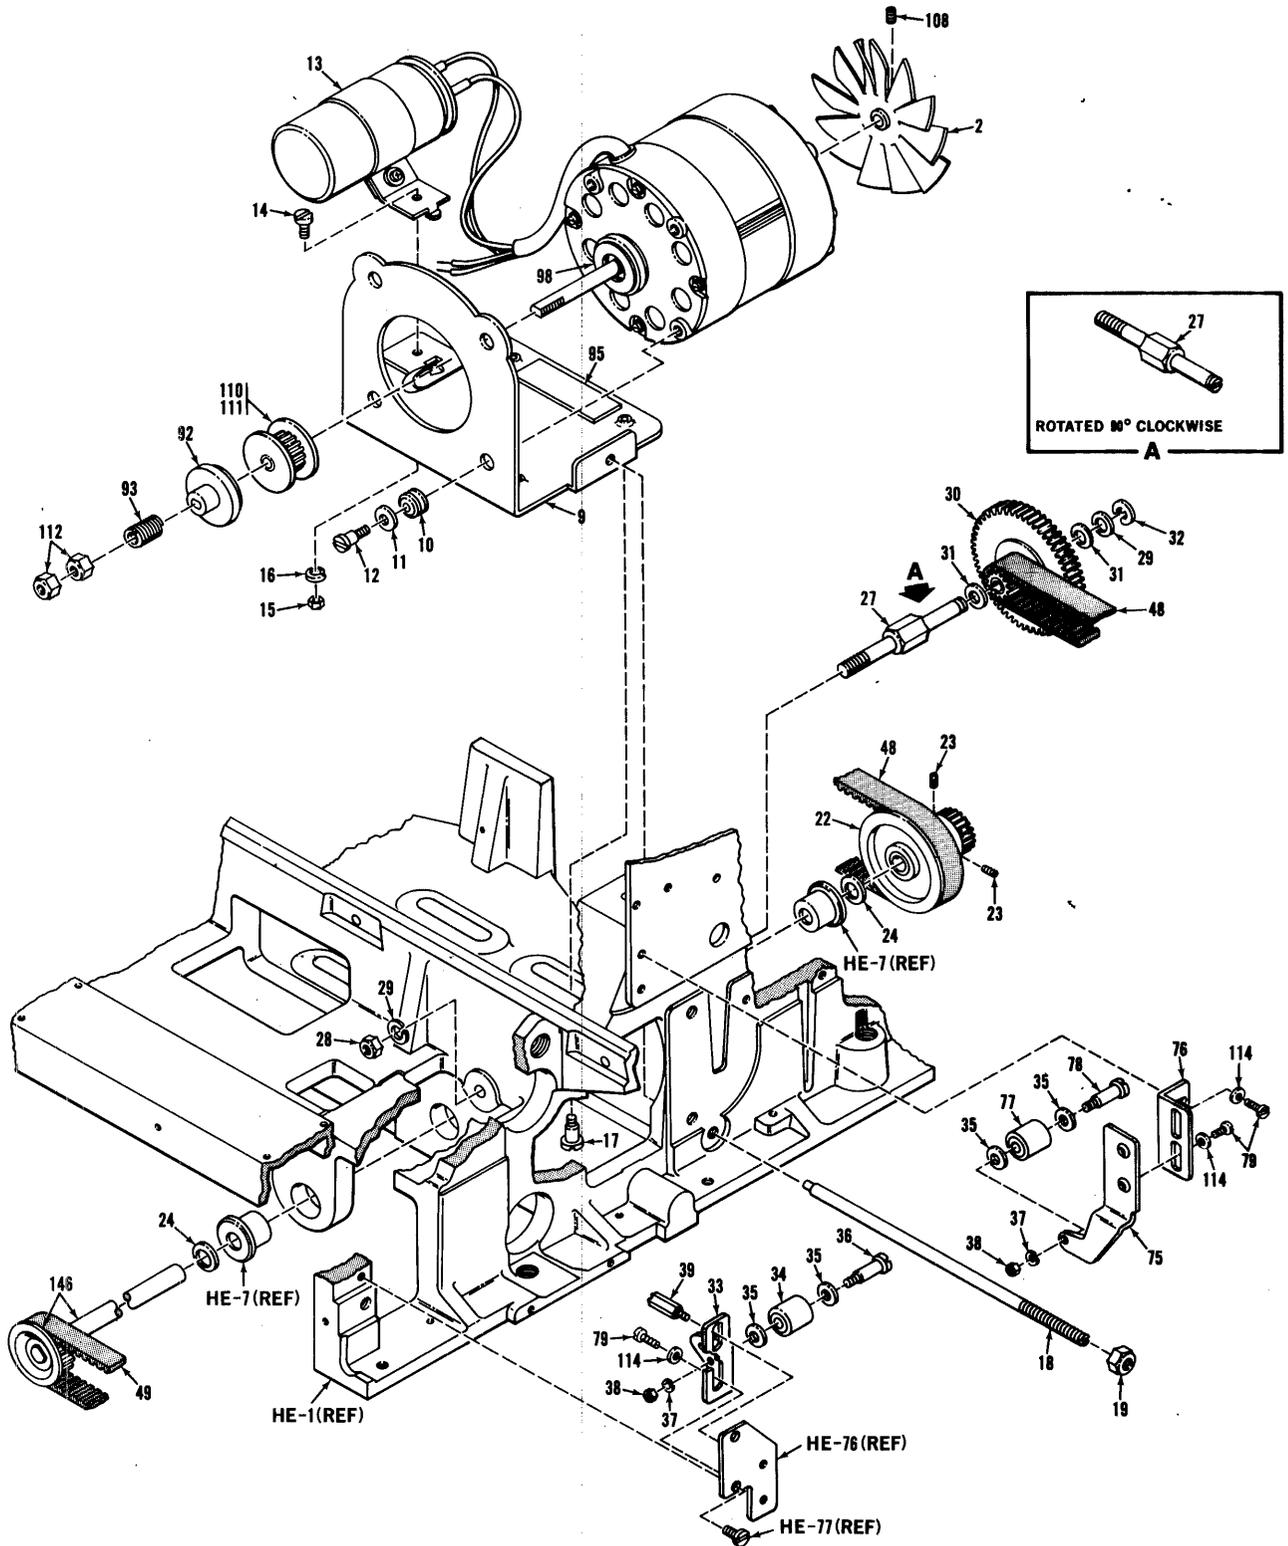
DRIVE MECHANISM – HB (PART 1), SERIES 101
